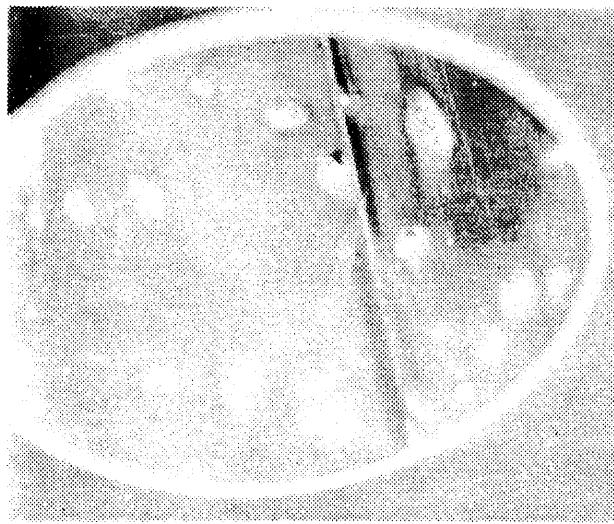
Pitting corrosion inside 1100 aluminum tube.
